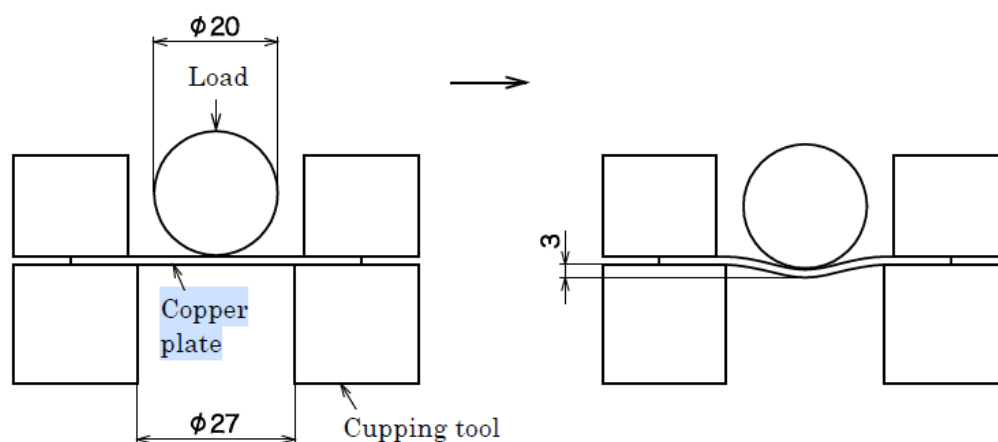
DIMENSIONS OF PENETRATOR, DIE AND BLANK-HOLDER
